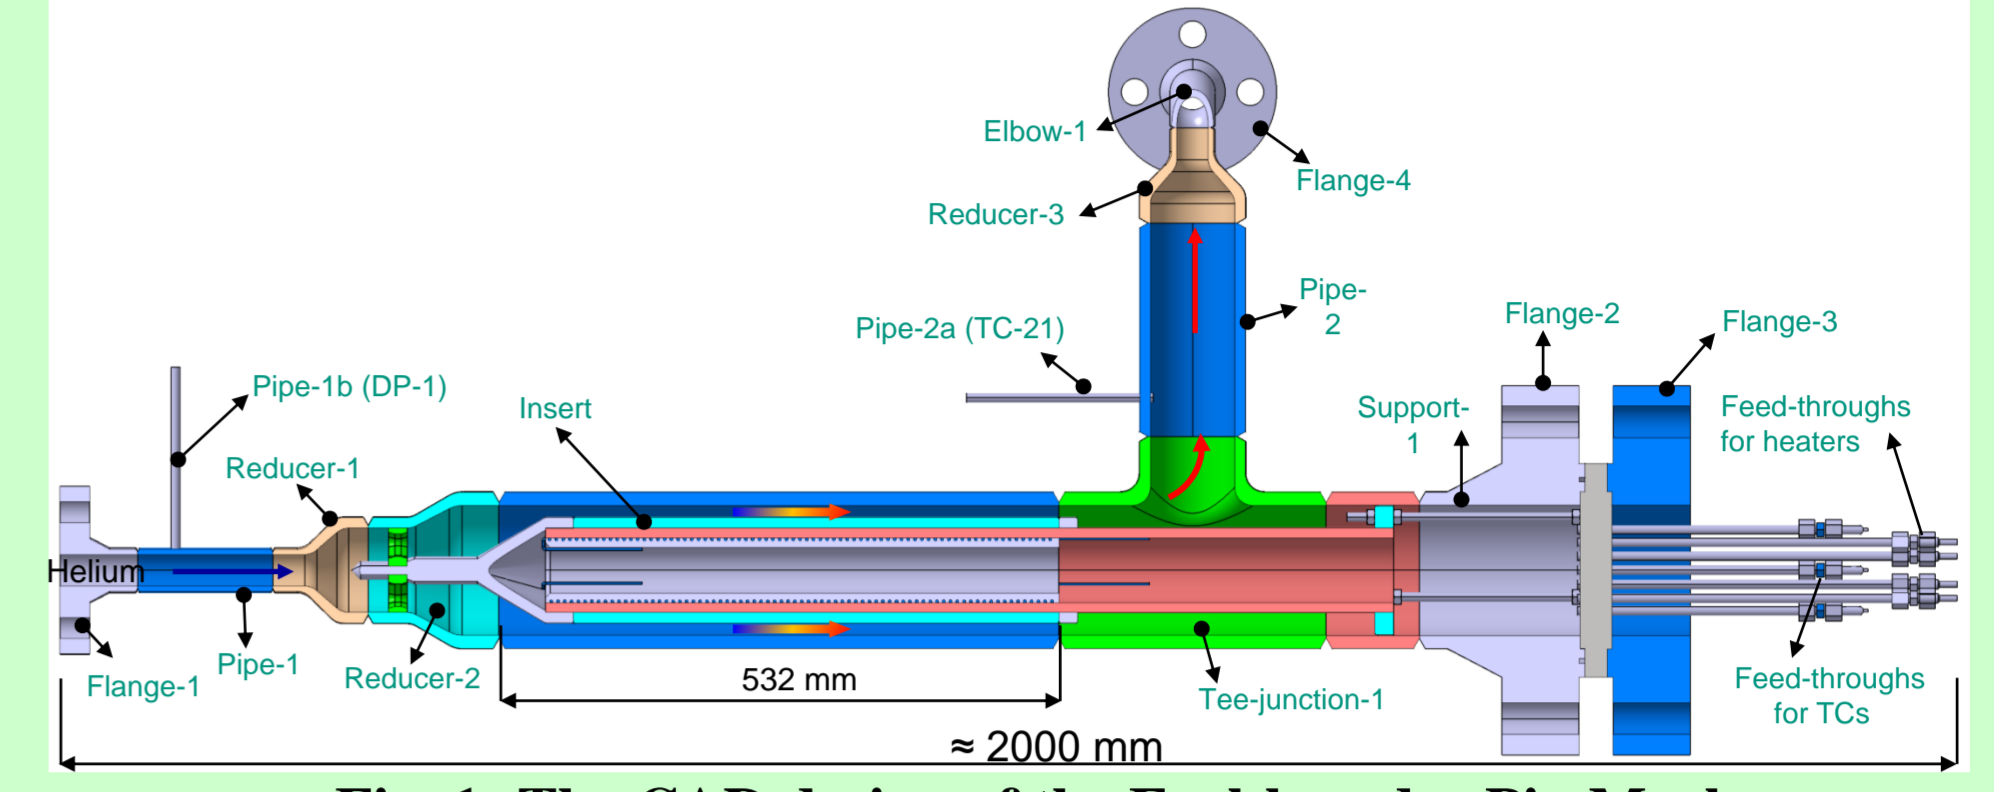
The CAD design of the Fuel-breeder Pin Mock-up.
